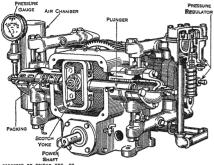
SPRAYER PUMP. CUT AWAY TO SHOW WORKING PARTS
